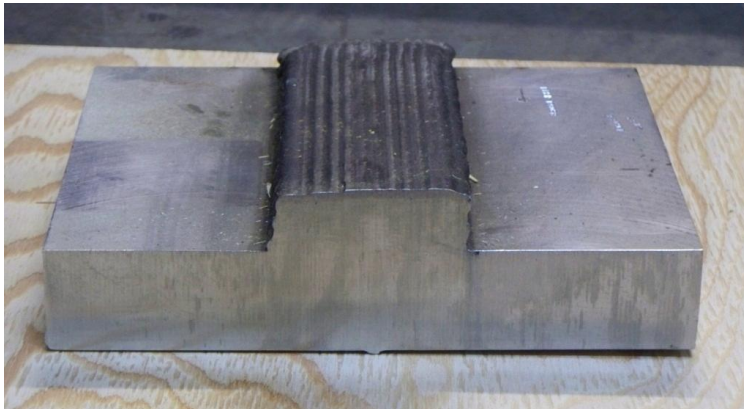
Global view of the GTAW 19508A weld, showing the two plates and the weld overlay.
